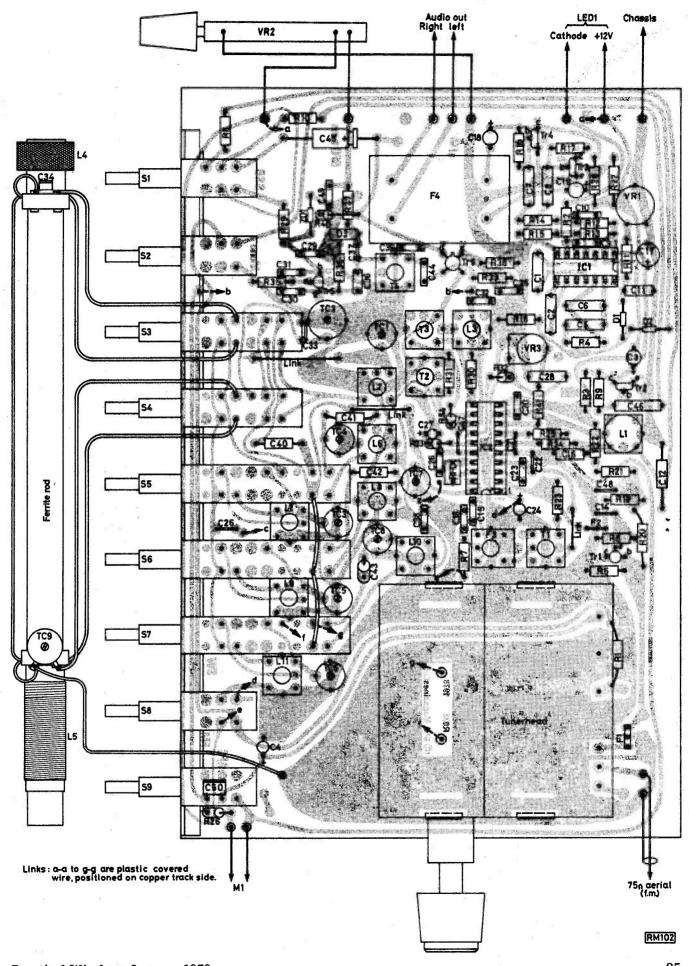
(below) The copper side layout of the p.c.b. Fig. 8b: (right) The p.c.b. component placement layout
